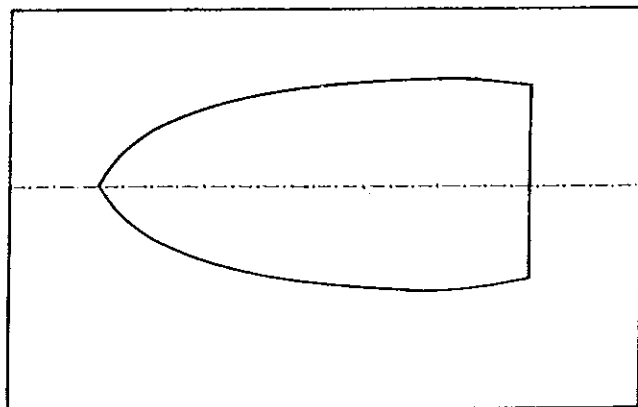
Illustration of the Experimental Point Profile 3 with Heavier Uniform Wall Reduction and Shorter Point Working Length.
